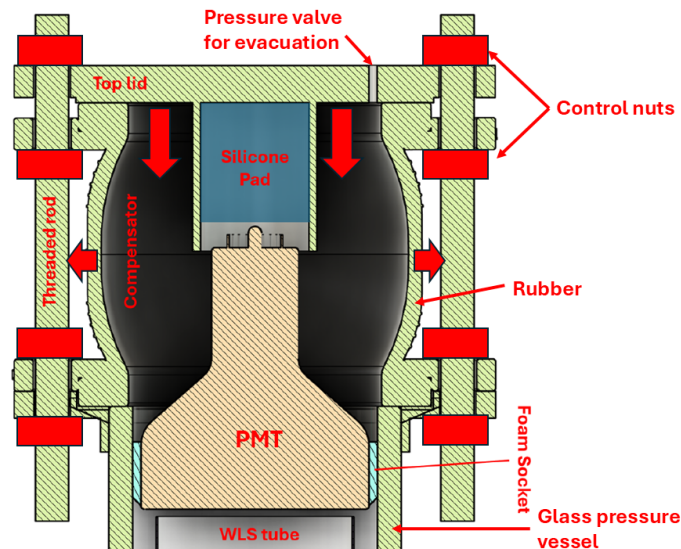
CAD model of the compensator used for gluing [115]. The compensator is mounted on a pressure vessel, where the tube with one glued PMT is located. The PMT is initially held inside the pressure vessel by the foam sock applied to it previously. The arrows visualize the compression at evacuation.
